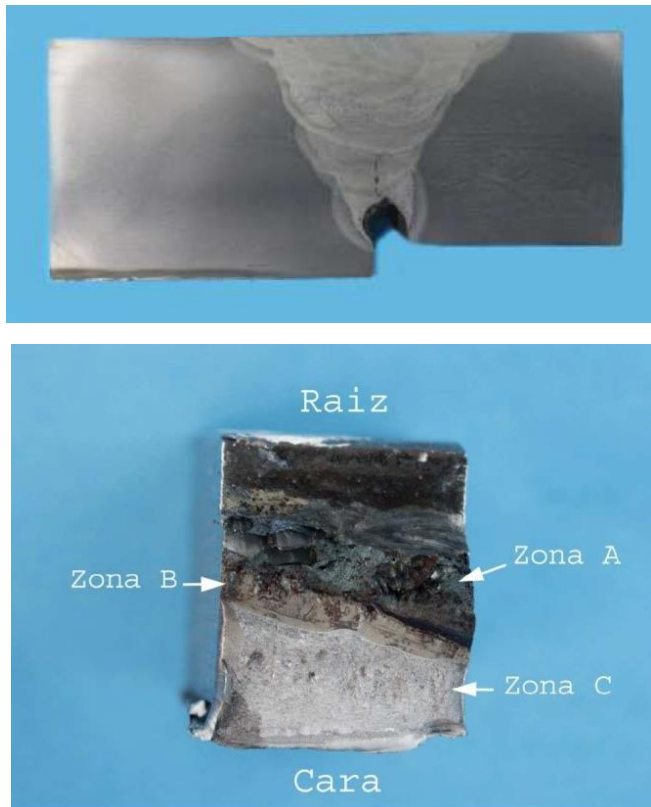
Fatigue crack initiation coming from a notch due to lack of backing
